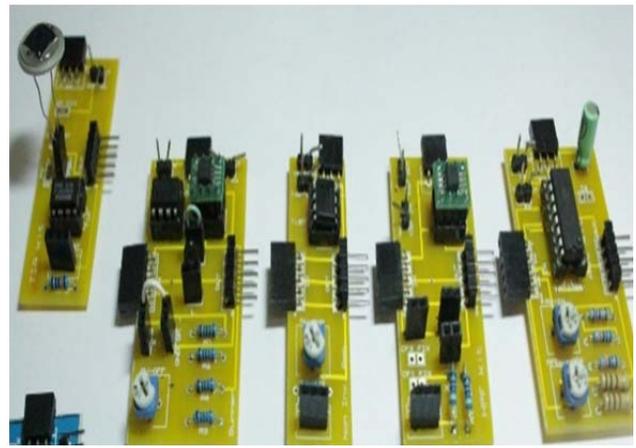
A Photograph of AFE receiver module fabricated in double layer printed-of-board (PCB), from left side to right side respectively are: TIA module, Pre-Amp, Analog Filter, and the last is AGC. The transistor switch is assembled in different module
